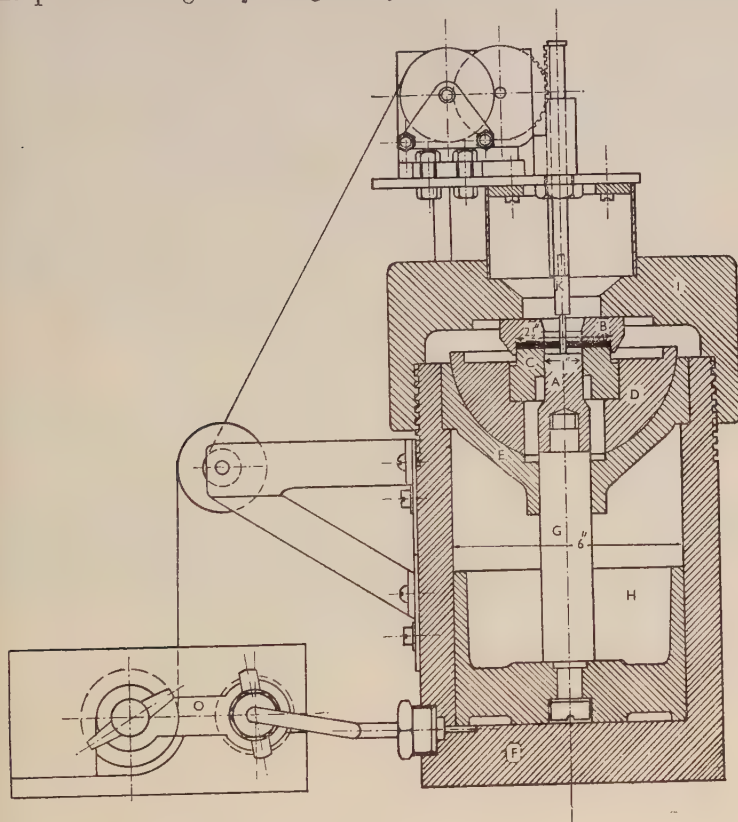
The Press Set Up for Punching with 1-in. Tool.
